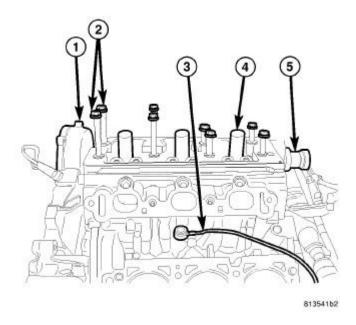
Right Cylinder Head Courtesy of CHRYSLER LLC
